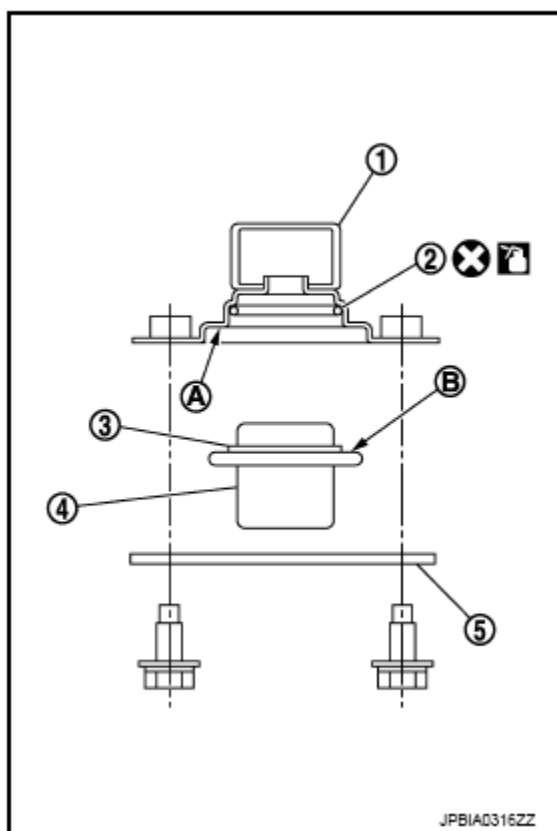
Identifying Fuel Tube, O-Ring, Spacer And Fuel Damper
